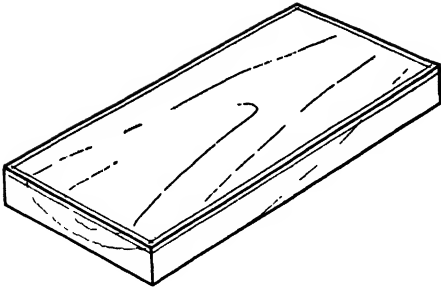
A piece marked preparatory to cutting a chamfer.
